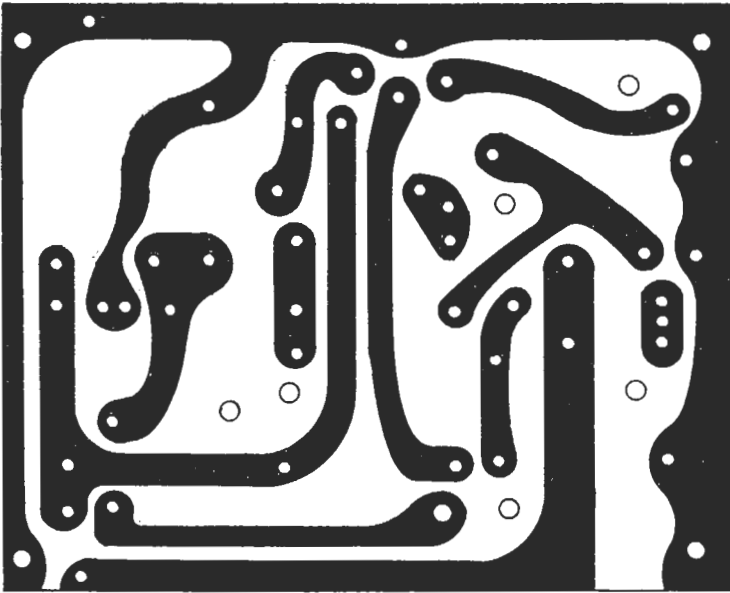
If you decide to make your own printed circuit board, use this full-size drawing as a guide to proper etching of foil side of board.
